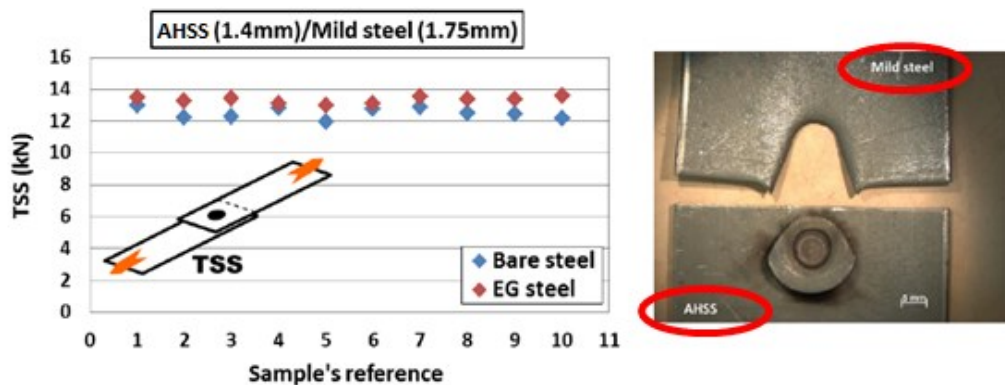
Dissimilar weld case shows fracture to occur in the mild steel side of the joint [82]
